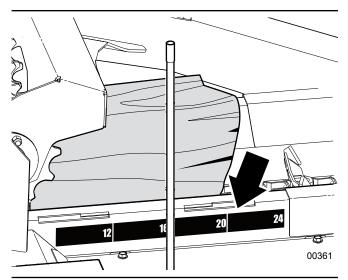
Length Guide on Operator Side of Infeed Conveyor
